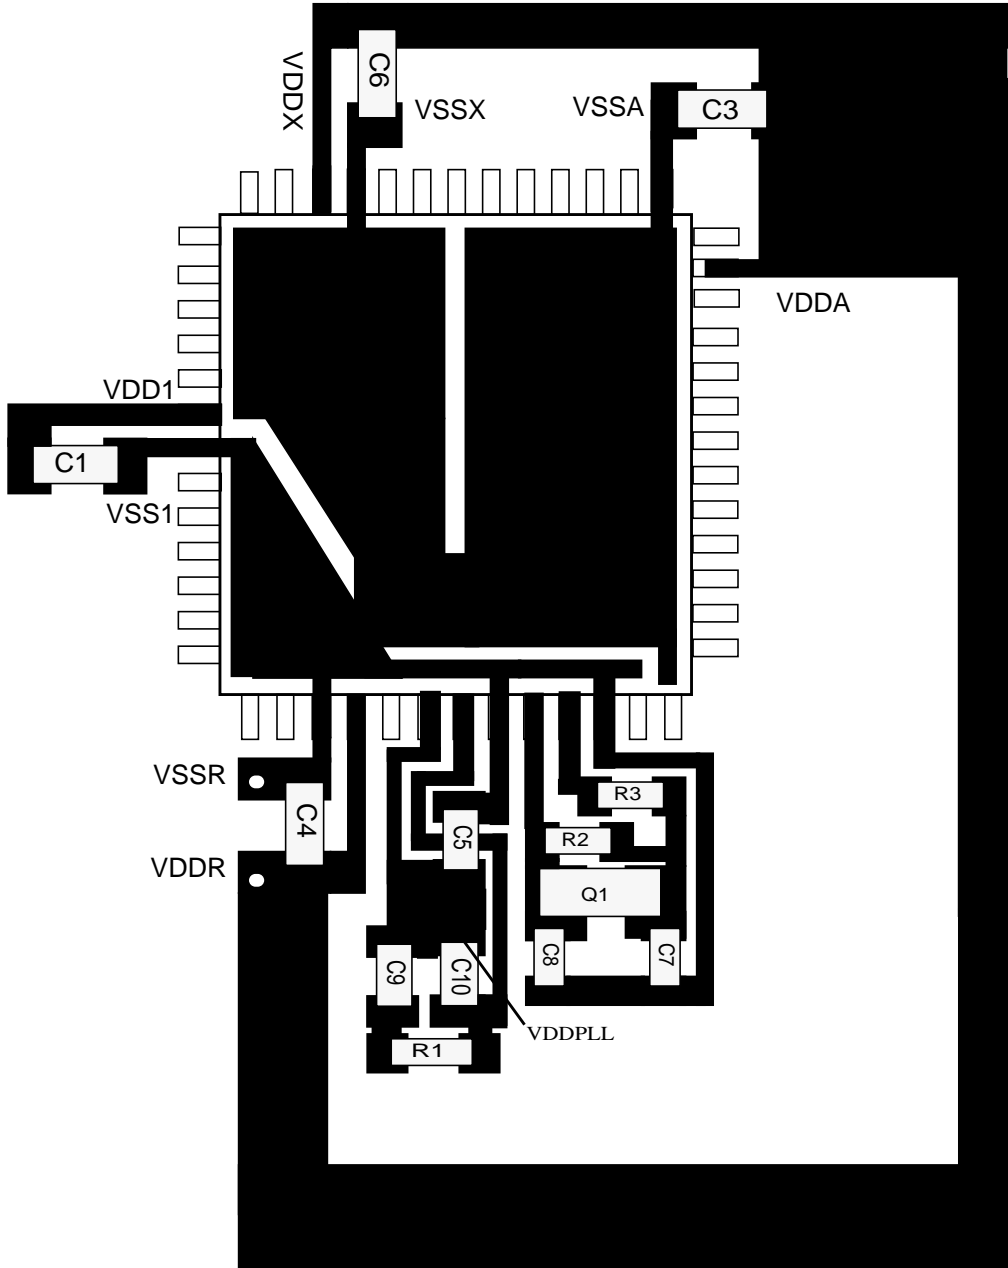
Recommended PCB Layout for 52 LQFP Pierce Oscillator
